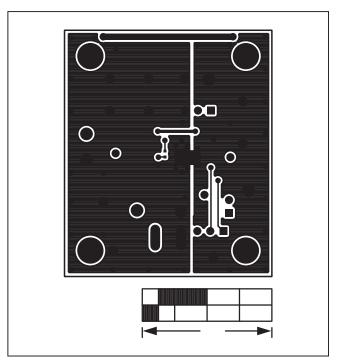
MAX16904 EV Kit PCB Layout—Solder Side
